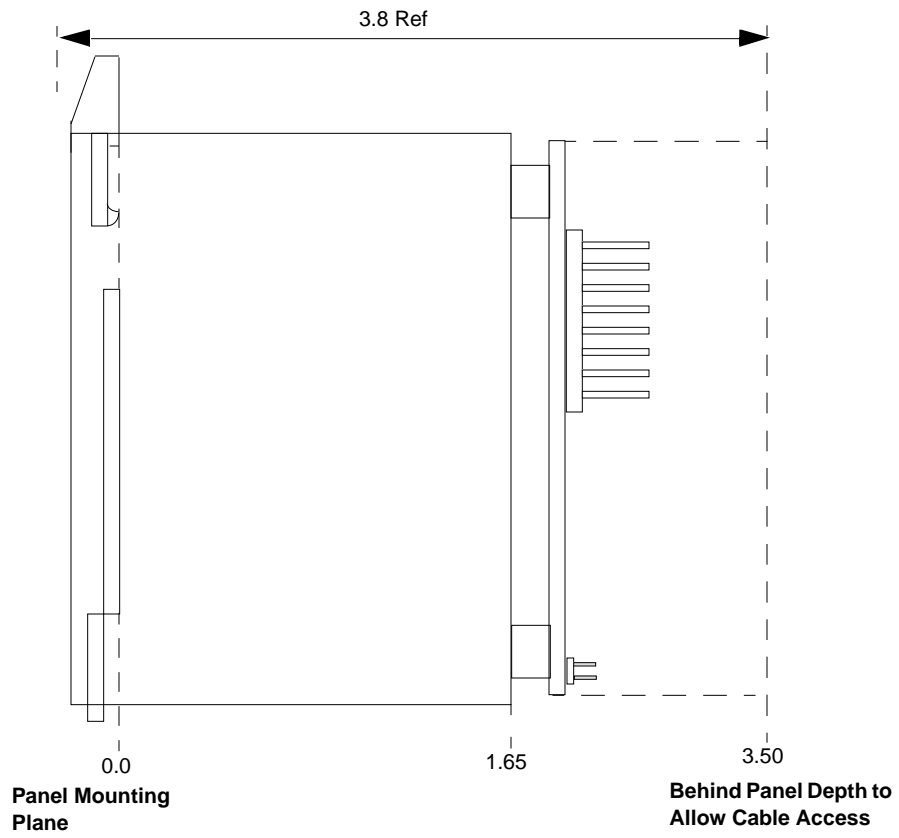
Printer Dimensions (Side View without Rear Cover)
